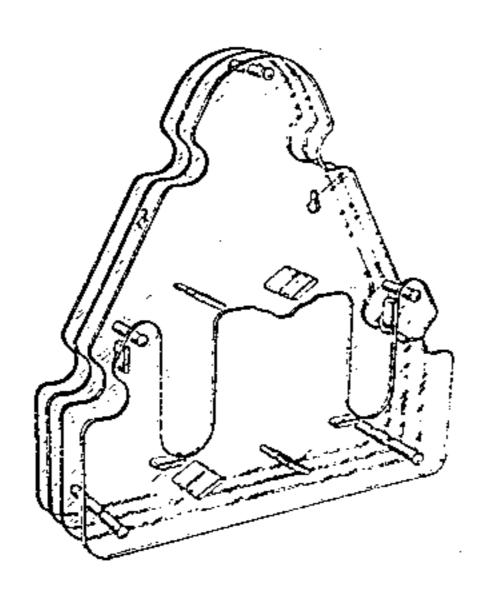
is a bottom, rear and right side perspective view of FIG. 8;
